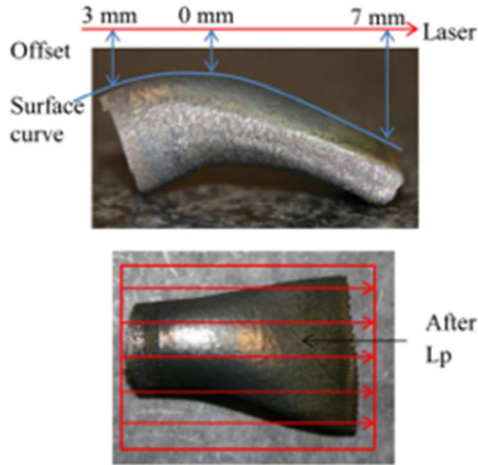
Photograph showing a complex part surface before and after laser polishing (Reprinted from [23])
